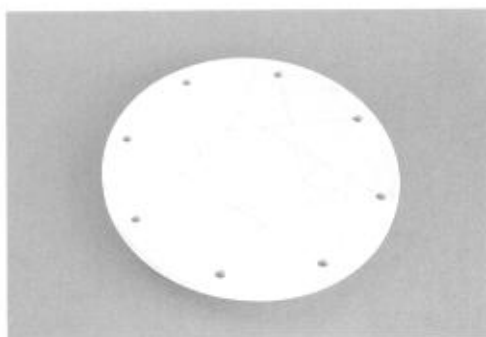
Peg holes were drilled into the upper surface of the board.
